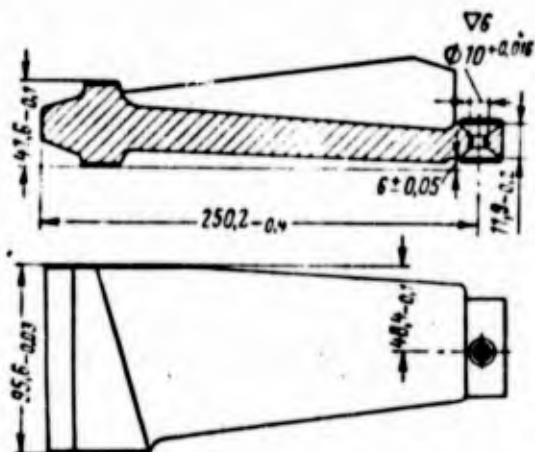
Flat base surfaces of turbine rotor blade.
